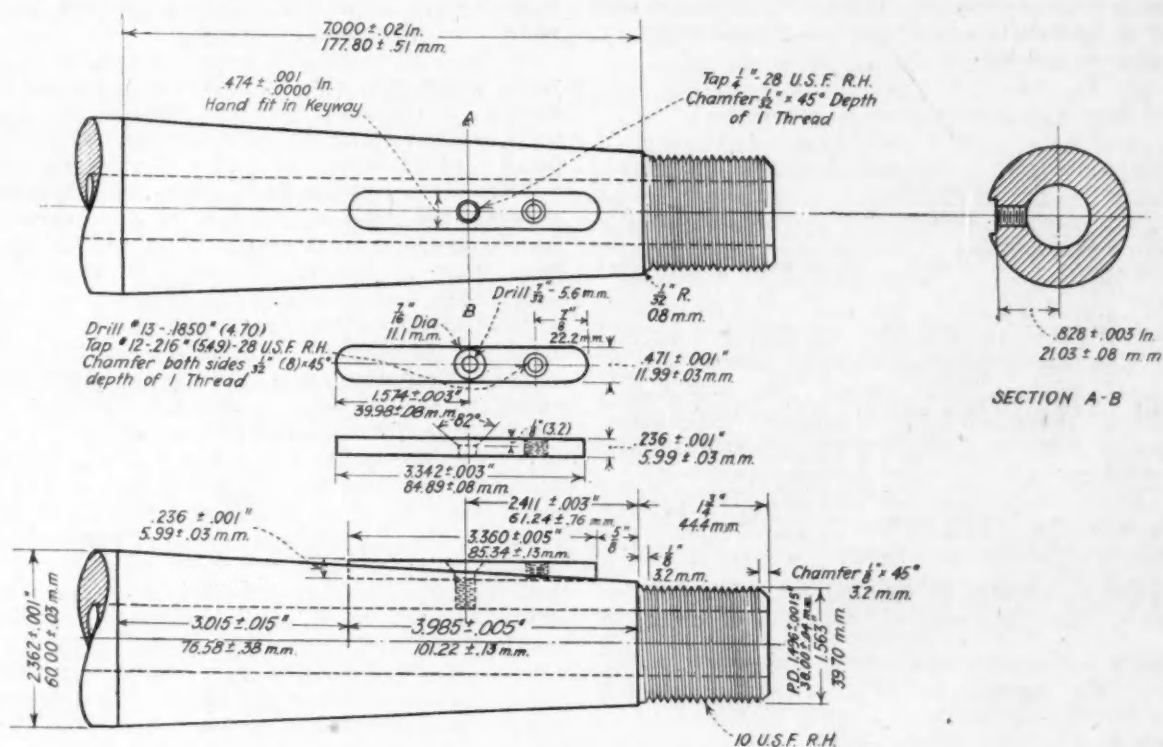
PROPELLER SHAFT-END FOR ENGINES DELIVERING LESS THAN 200 HORSEPOWER
